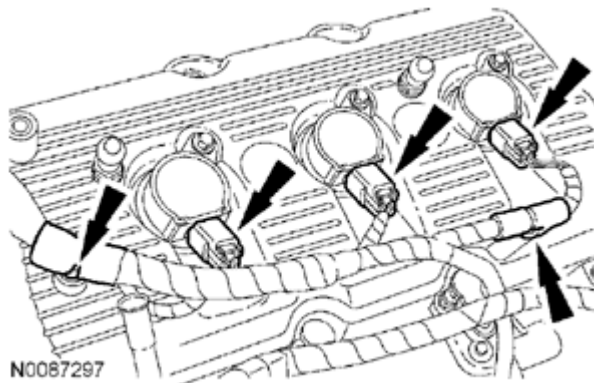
Locating LH Coil-On-Plug Electrical Connectors
